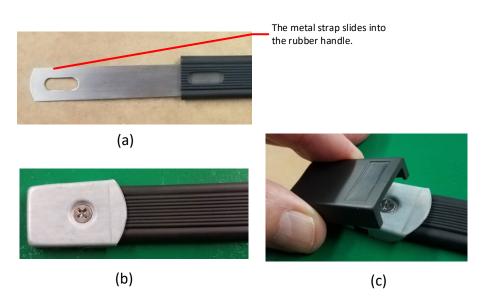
Installing the handle. (a) Insert the metal stiffener into the rubber handle. (b) The screw goes through the openings in the rubber handle and the stiffener. Then screw it into the pilot hole. Do the same on the other end. (c) Finally, snap the plastic caps into place.
